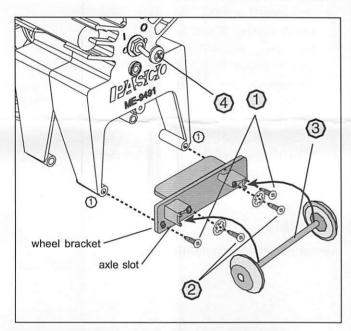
Attaching the Fan Accessory Wheel Set (ME-9492, not included) to the Fan Accessory.
